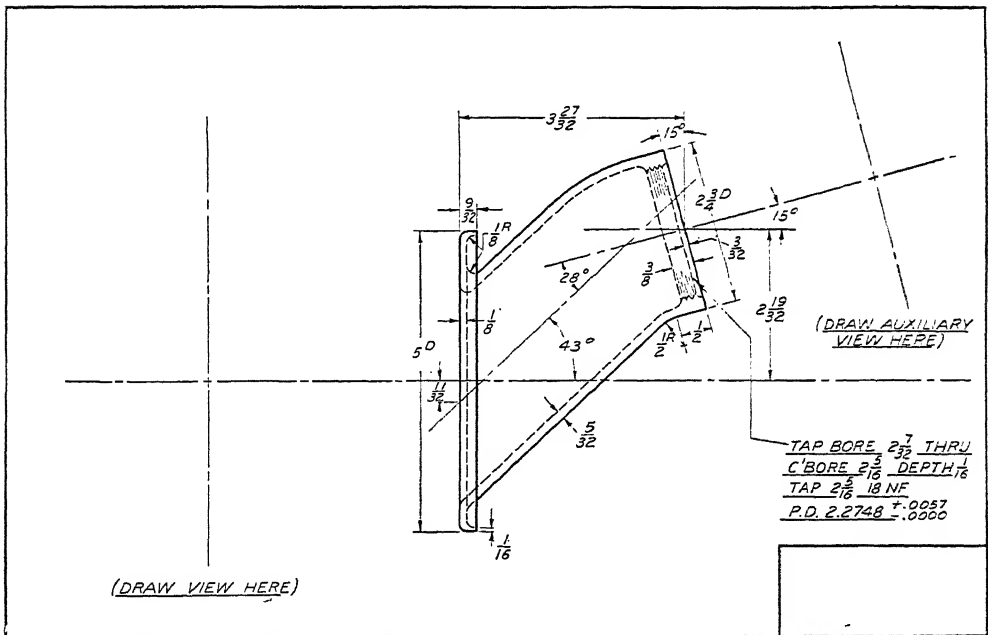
Oil Tank Filler Neck. Prob. 12-1.
